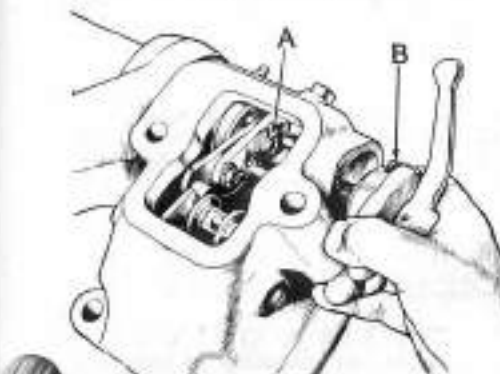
When removing override control lever assembly, detent spring is released as assembly is removed from housing; hold spring depressed when reassembling. Rockshaft can be withdrawn from housing after removing override control lever and snap ring (A).
